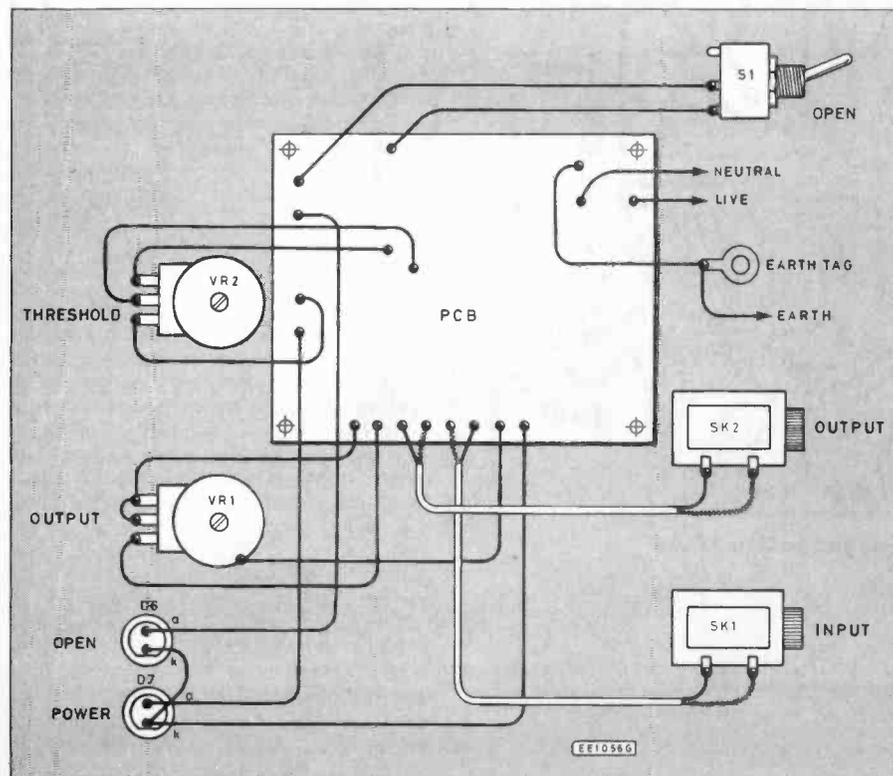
Front and rear panel wiring and connections to the p.c.b. The internal wiring, board positioning and rear mounted components are shown in the photographs above.
